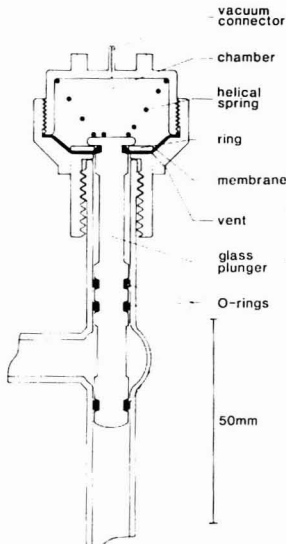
Cross section of O-ring glass tap with vacuum actuator. Materials used were Delrin or PVC for knob and ring, butyl rubber for membrane, and 1 mm steel for the spring.
